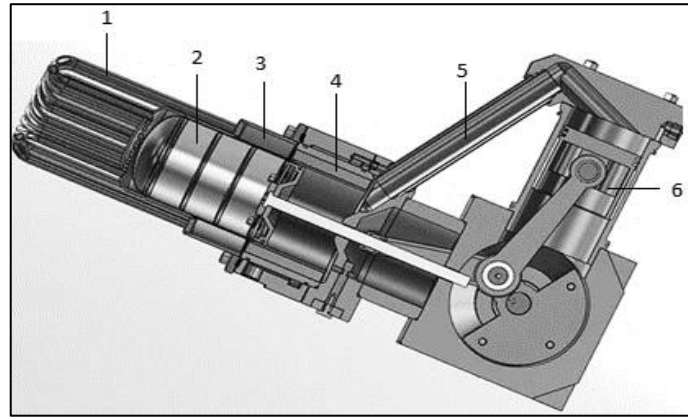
Engine components: 1- Heater, 2- Displacer piston, 3- Regenerator, 4-Cooler, 5-Connecting pipe, 6-Power piston.
